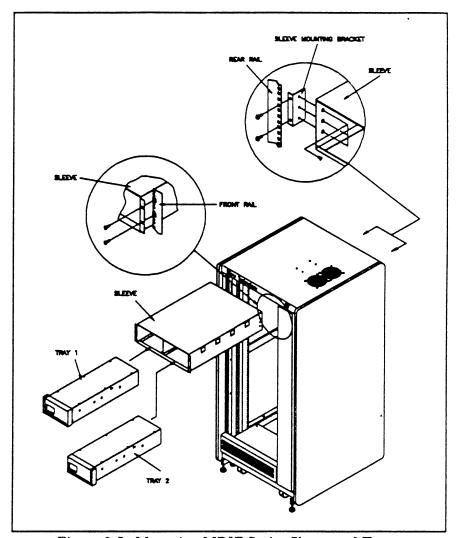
Mounting MDIF Series Sleeve and Trays
